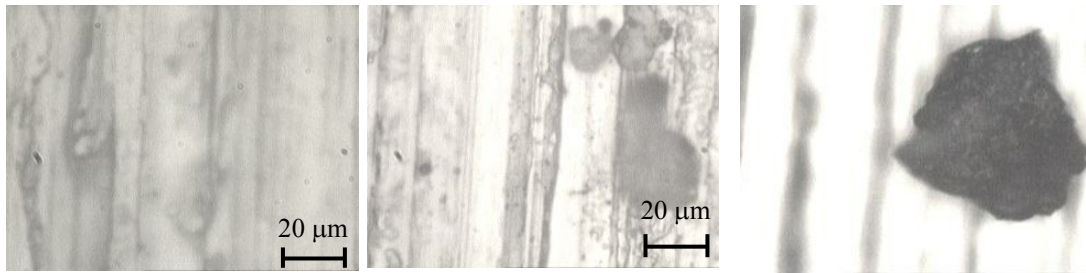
Workpiece surface appearance depending on grinding wheel grain size
